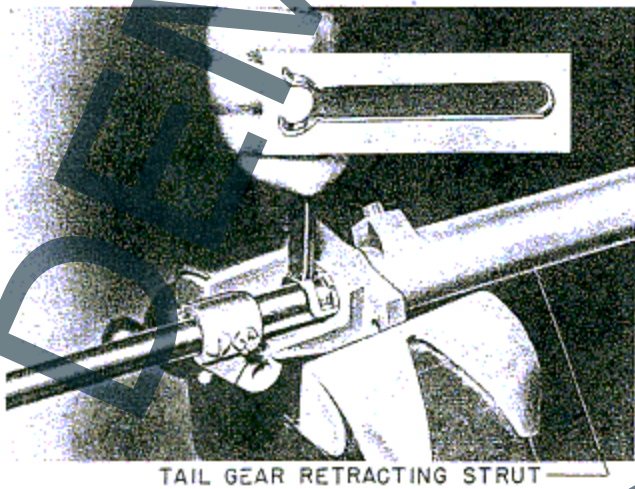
Cylinder Bushing Spanner Wrench, P-10189
